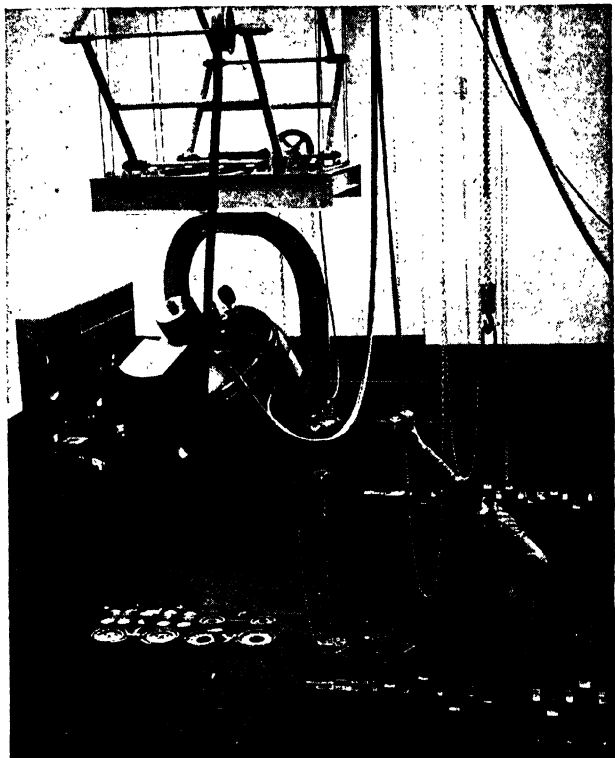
A million-volt industrial X-ray unit. Adjustment of tube head prior to radiographing steel casting. (General Electric X-ray Corporation)
